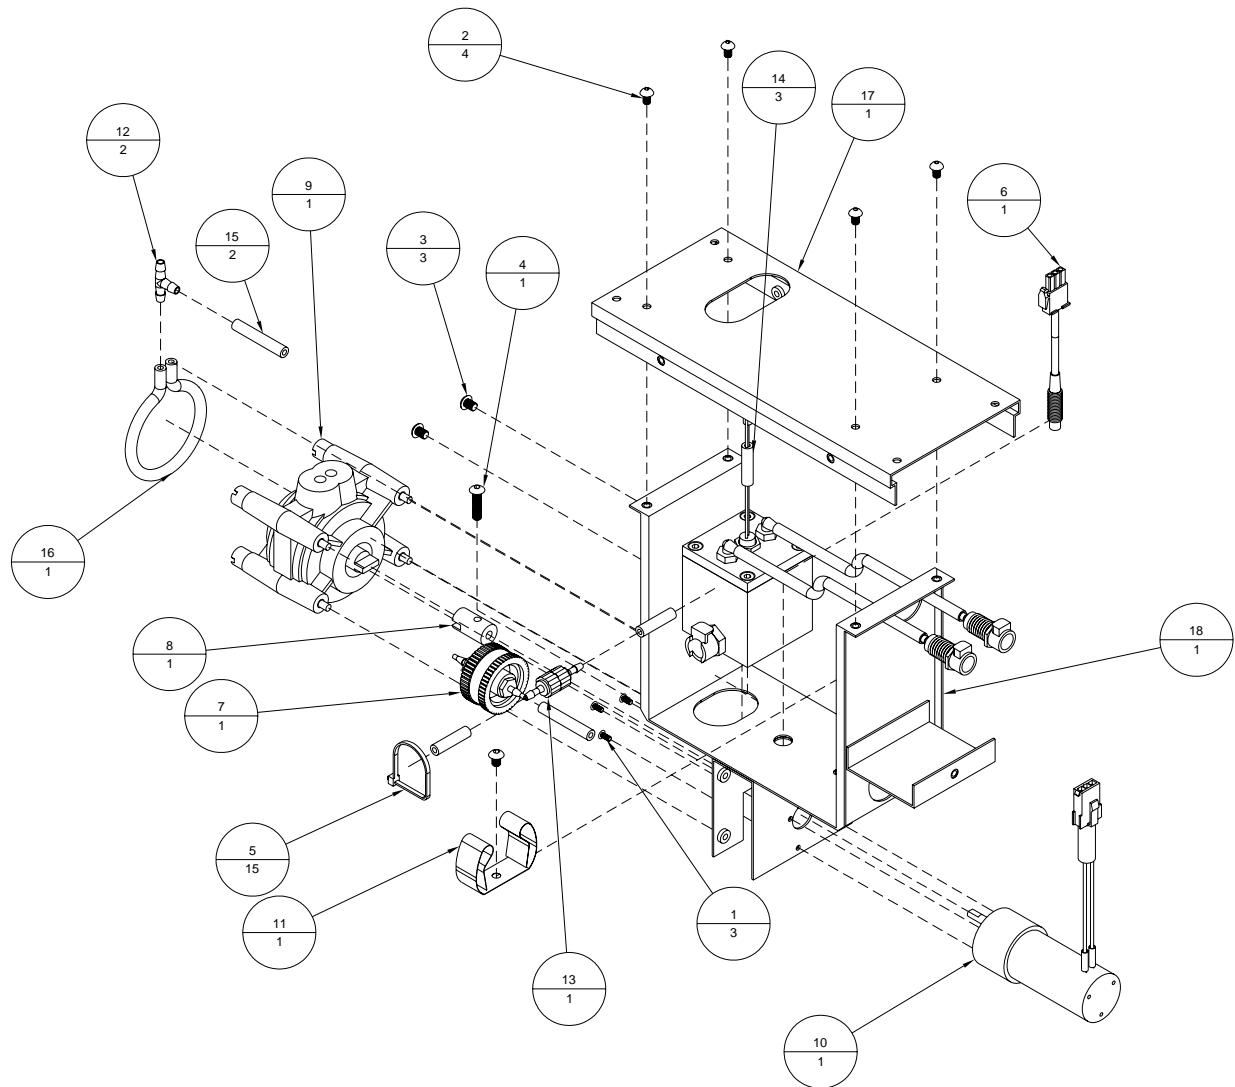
Atlas Pumping Subbracket Assembly (9103016A)
